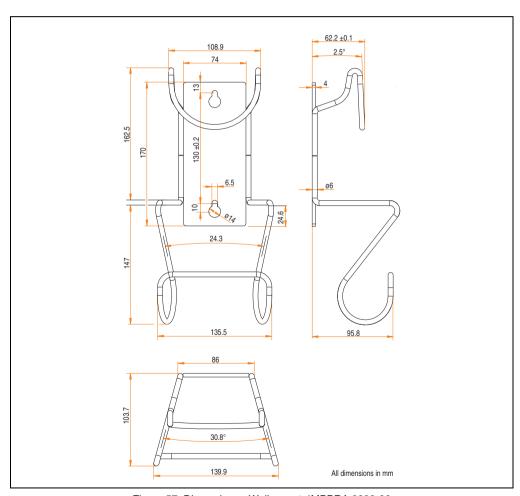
Dimensions - Wall mount 4MPBRA.0000-00
